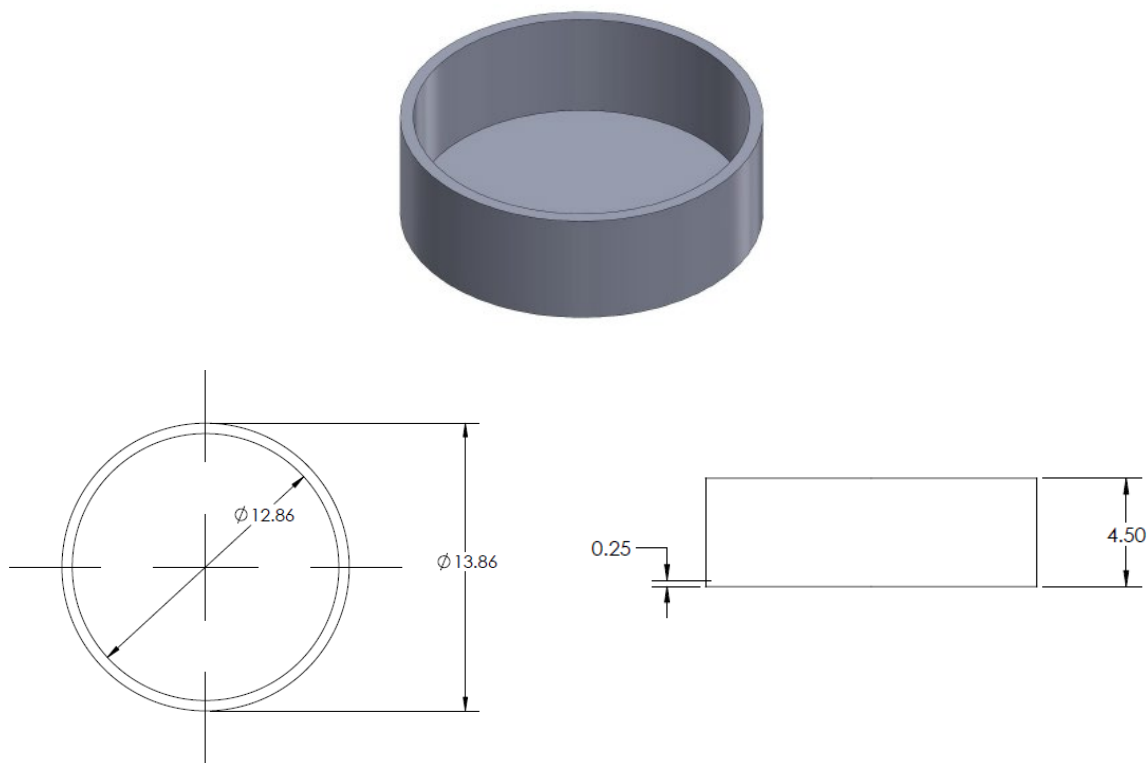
Dimensioned drawing of updated crucible design for larger version of the MFC.
